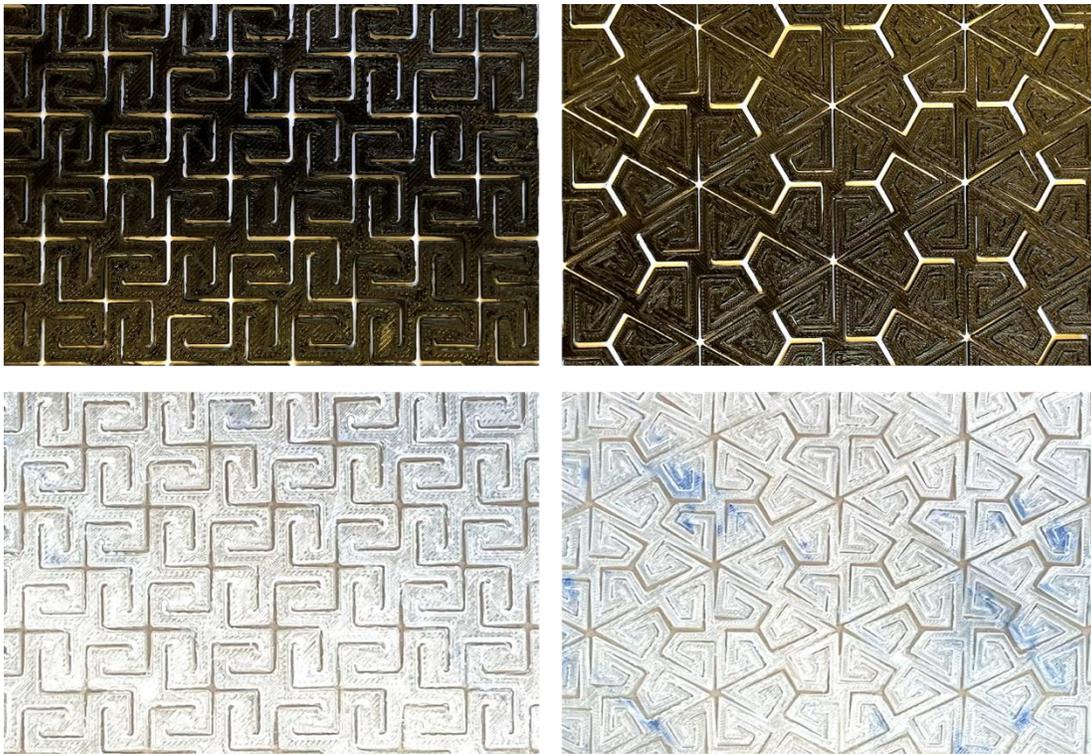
3D printed PLA (top) and TPU (bottom) kerf panels
